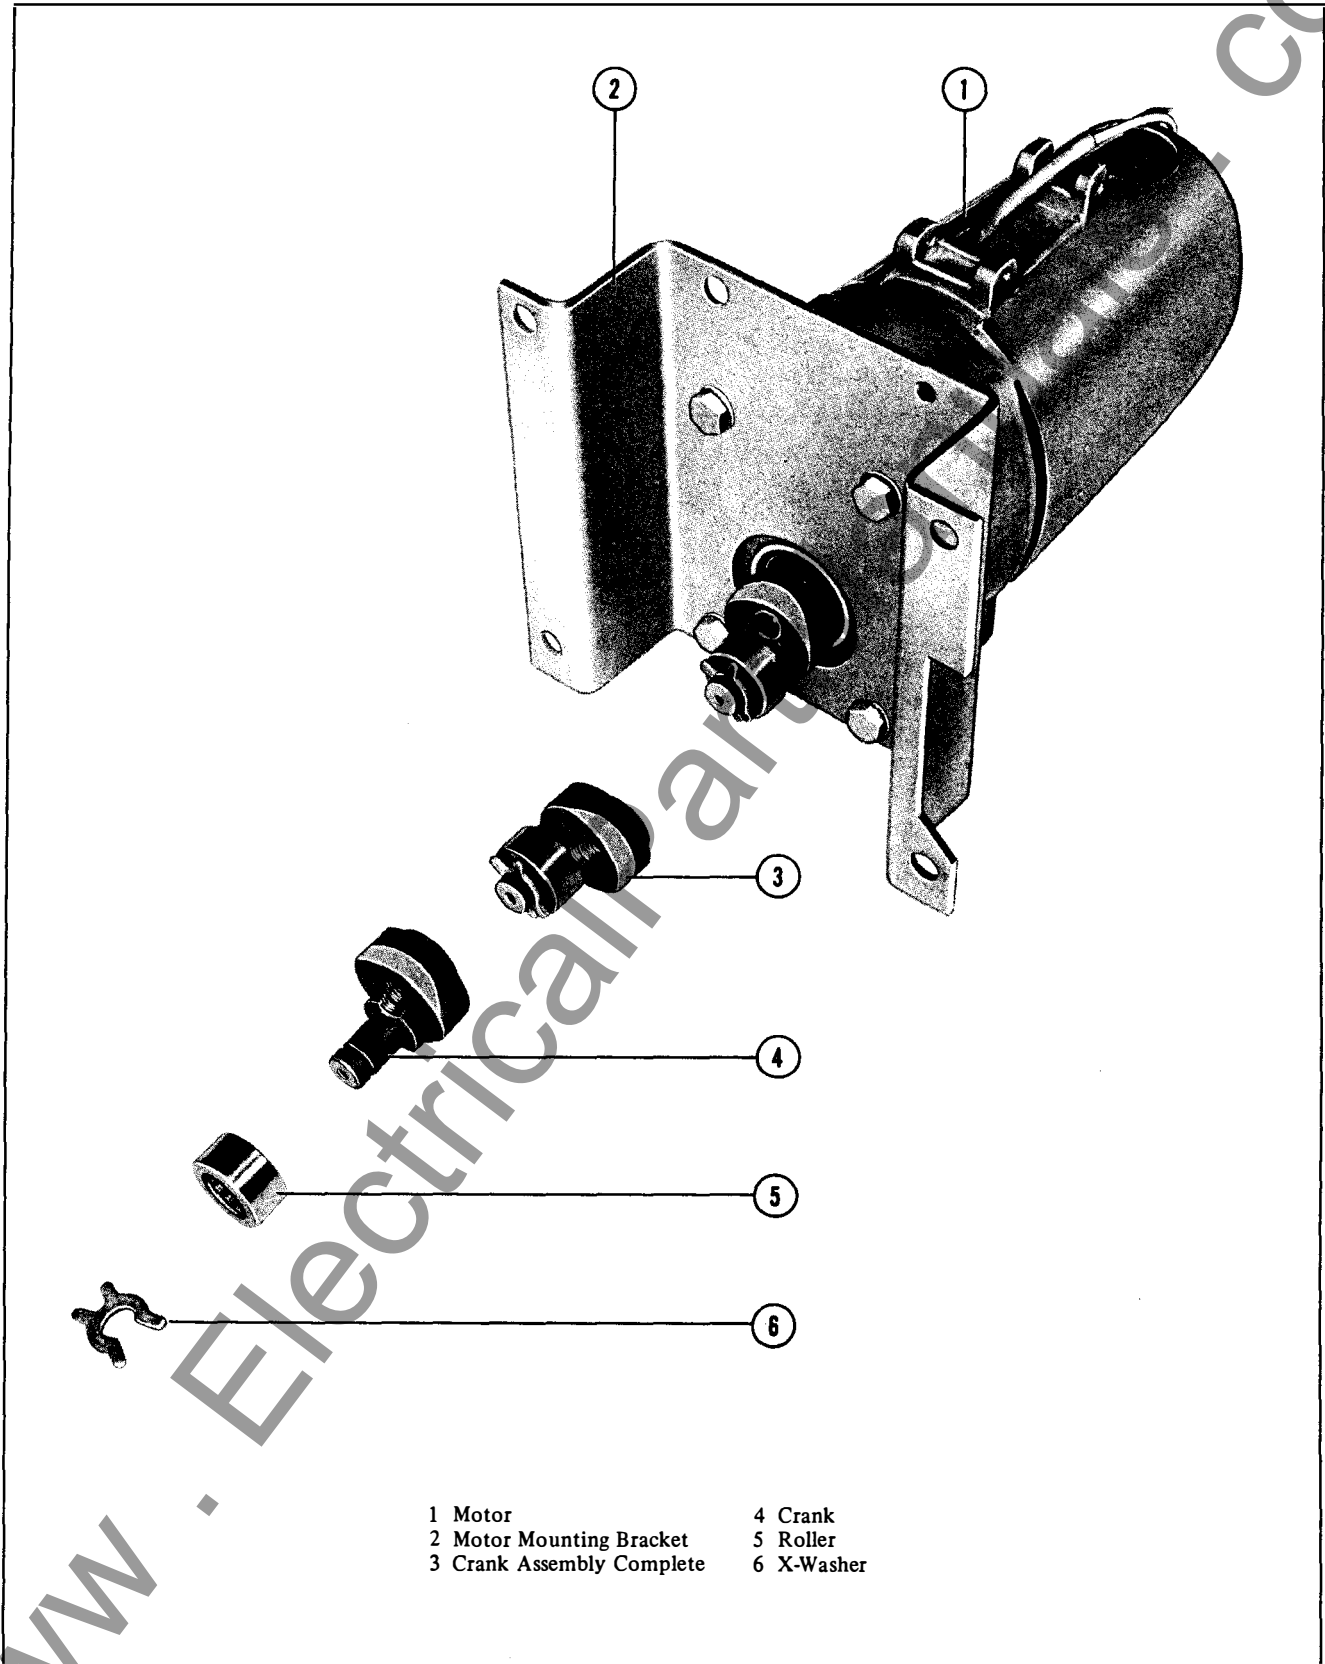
Spring Charging Motor Assembly – DVP Breaker (393903)
